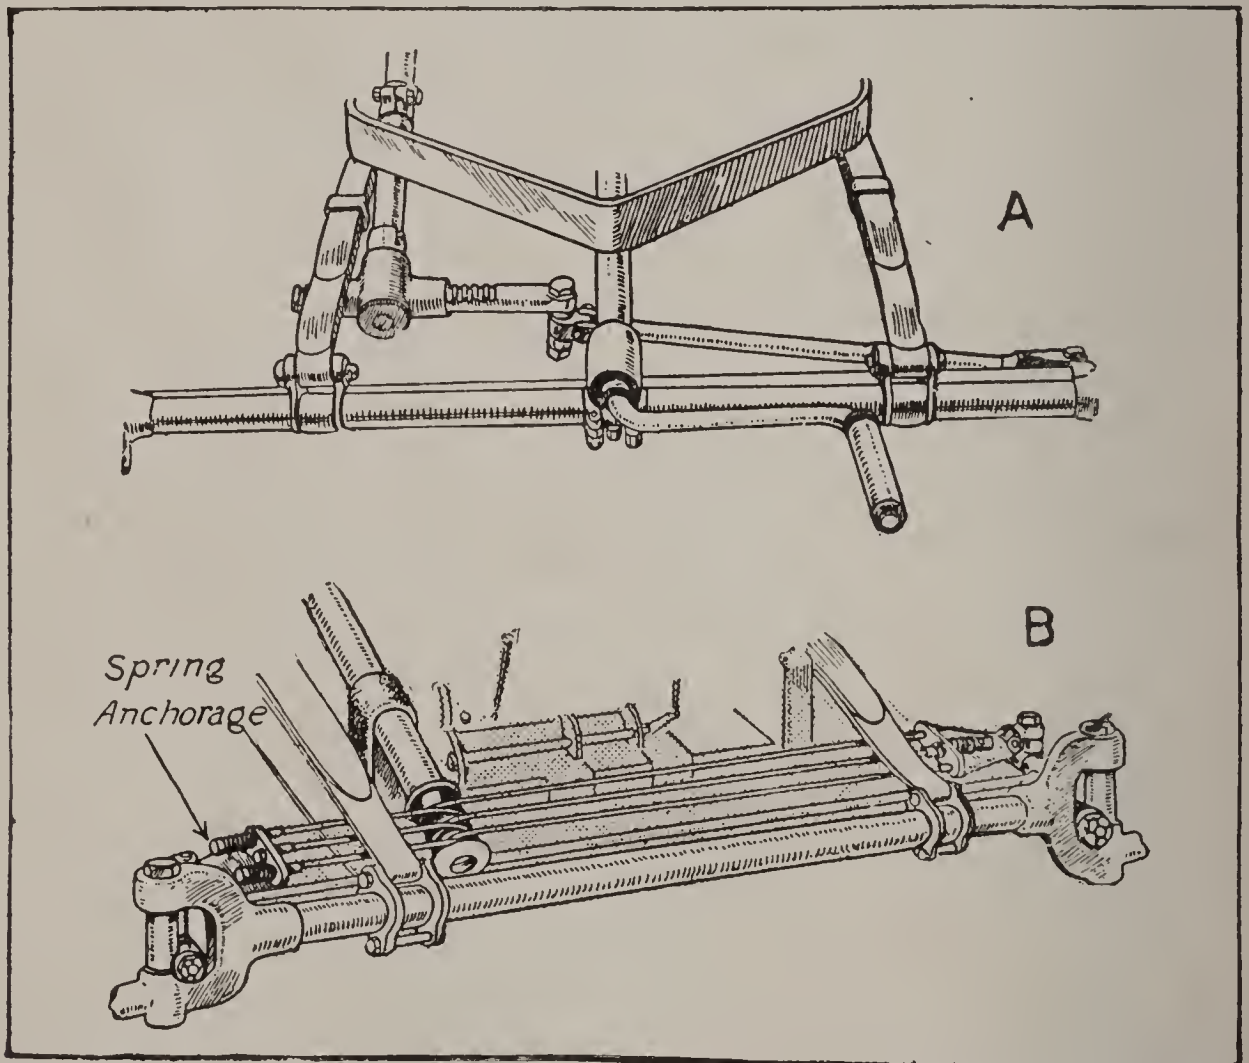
Methods of Steering Cyclecars. A—By Rack and Pinion Reduction Gear. B—By Wire Cables and Drum.
